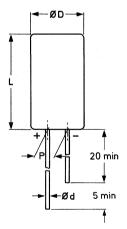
Style 1; see Table 1 for dimensions d, D, L and P.
